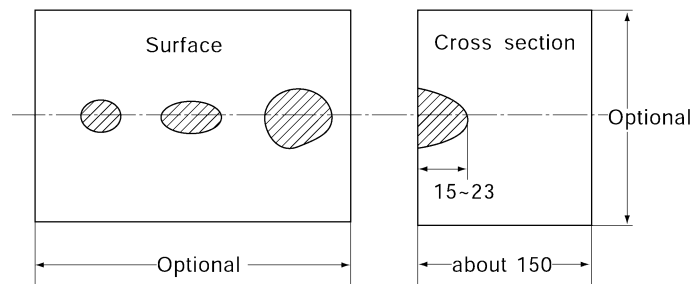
Test of mold cavity welding (Unit : mm)
